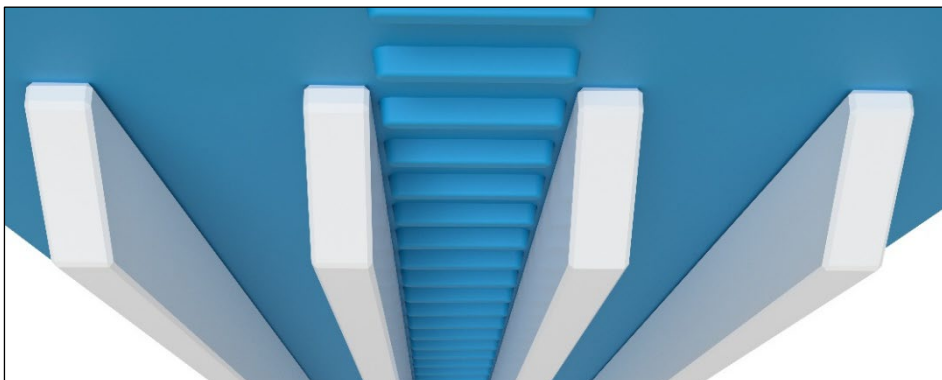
CENTERING GUIDES ON CENTRAL LUG
